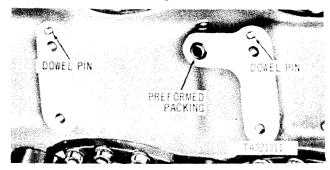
Location of preformed packing at oil transfer tube for fuel injection pump mounting base.
